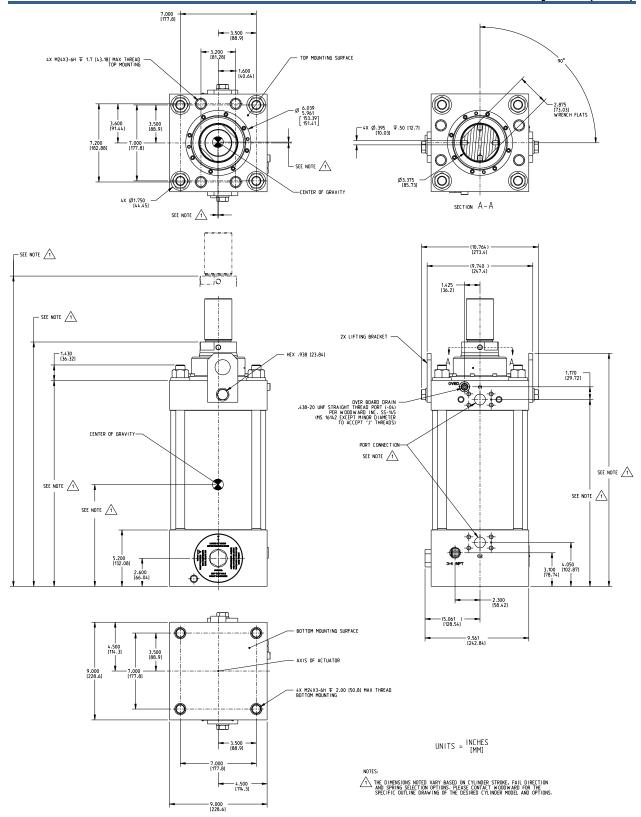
VSPC 8 inch bore, Installation Dimensions for Remote Cylinder
